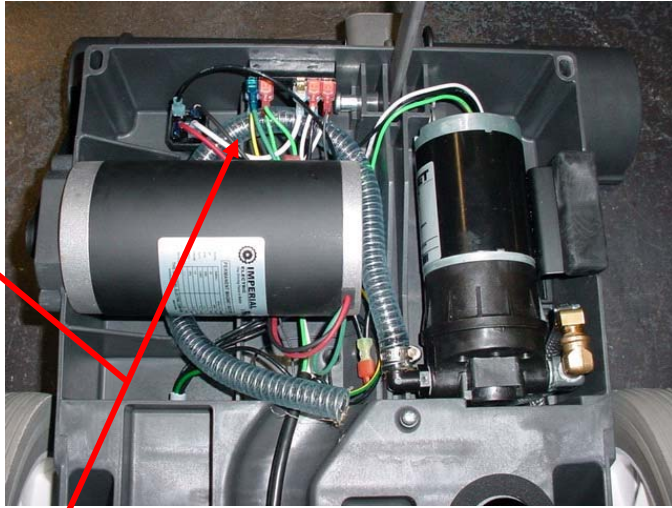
Hose routing between solution tank fitting and pump inlet fitting revised to reduce stress on tank and pump inlet fitting.
